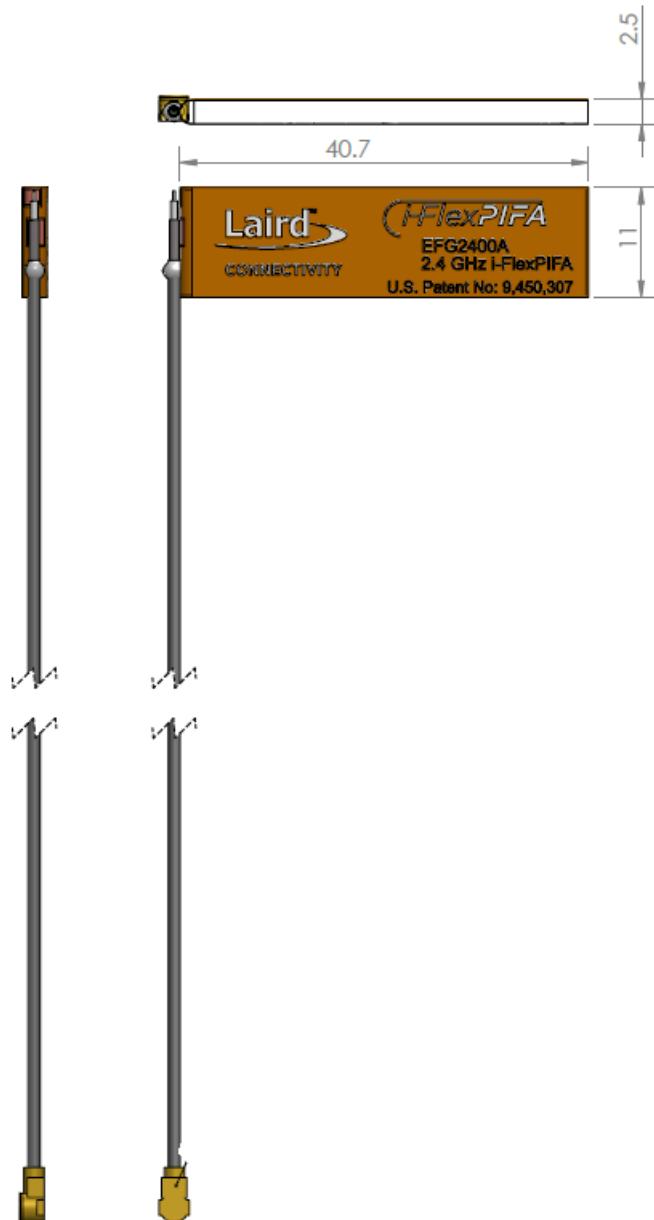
i-FlexPIFA mechanical drawing of EFG2400A Antenna
